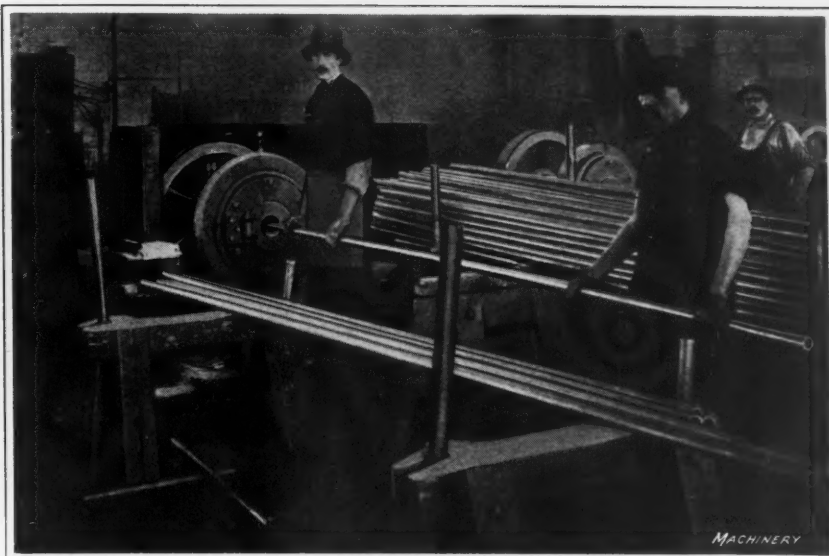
Rotary Type of Pointing Machine on which One End of the Pierced Billet is reduced to a Diameter Small Enough to enable it to pass through the Tube Drawing Die
